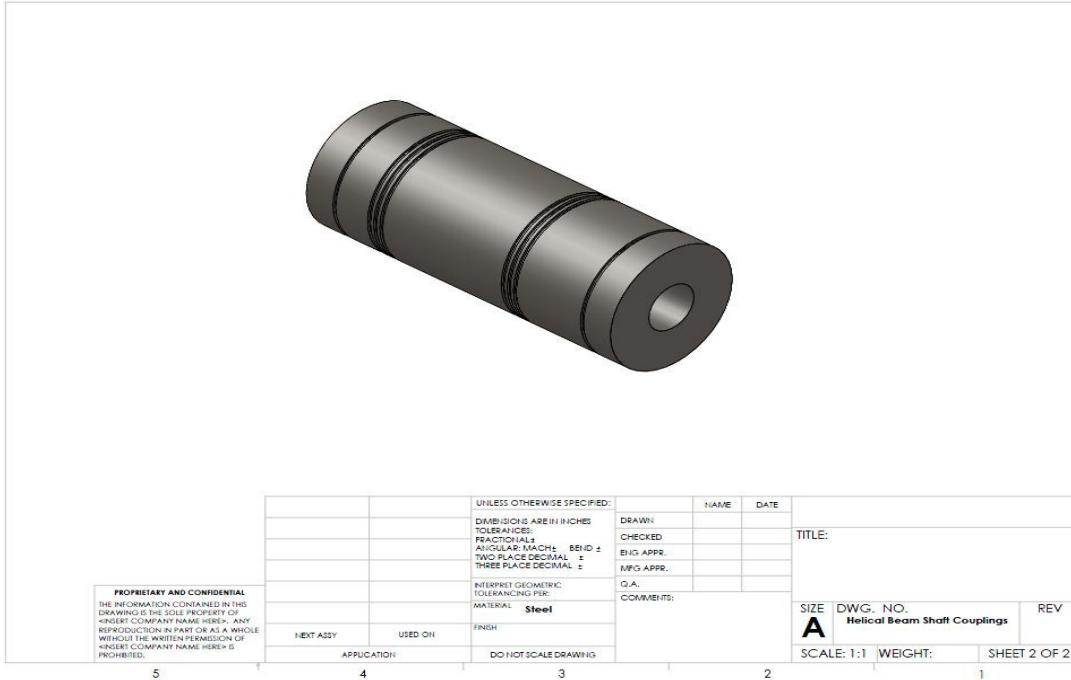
Helical beam shaft coupling for flapping mechanism
